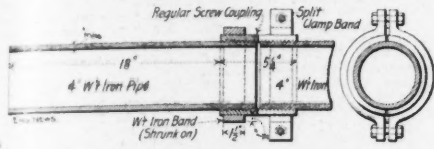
Device Used for Screwing Up the 4-in. Wrought Iron Pipe.
